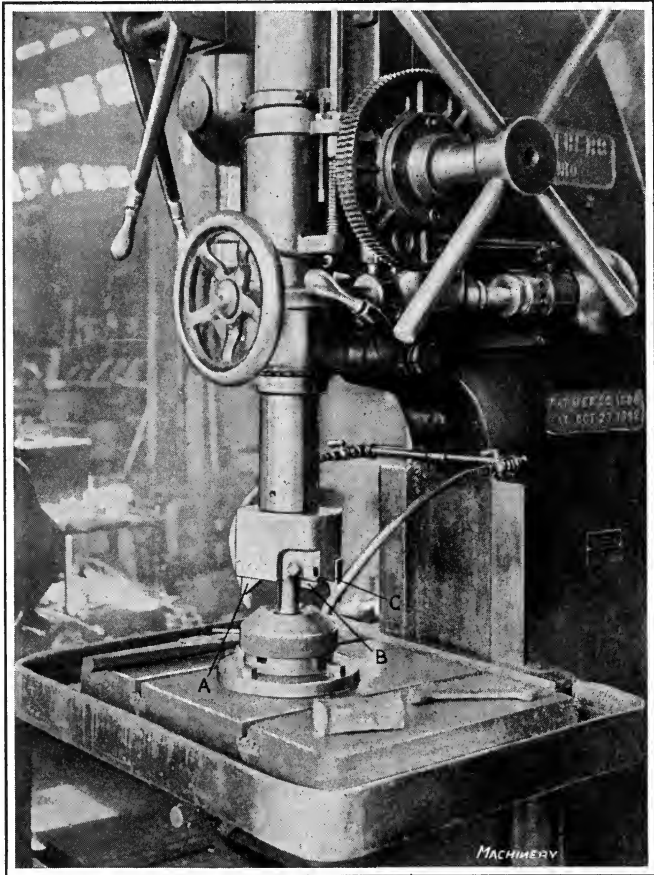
Tools and Work-holding Fixture for Forming Bevel Gear Blanks on High-duty Drilling Machine
